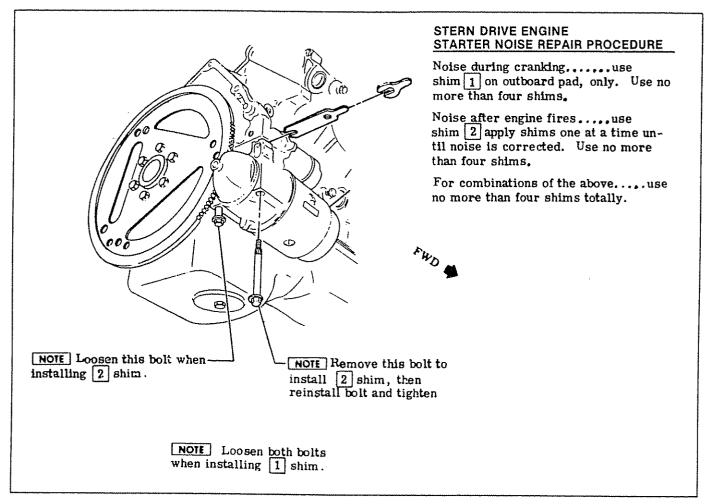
D-22s-Starter Motor Shimming (Exc LF9)
